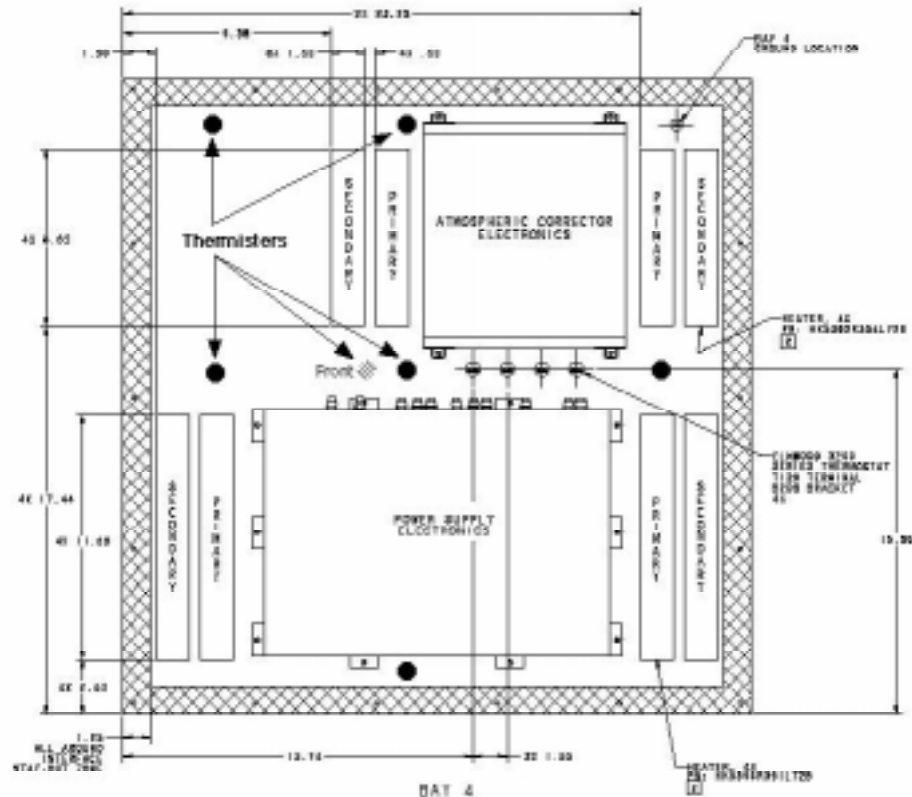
Layout of boxes, thermistors and inserts on C-C radiator.
